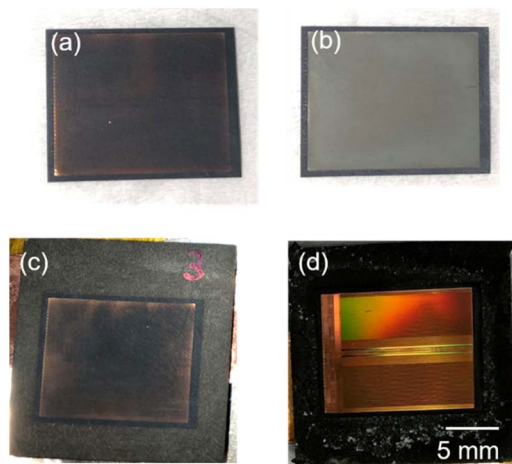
(a) Frontside, (b) flip-side of 3D four-die stacked package with FR4 removed by mechanical grinding, (c) encapsulation in Molding Material B mechanical support and mechanical grinding with SiC paper to remove the EMC to stop at DA5 and (d) after chemical decapsulation with fuming sulphuric acid (20% SO₃) mixed to 100% fuming nitric acid (1:1), at 100°C on the hotplate to remove DA5 to expose Die 4
